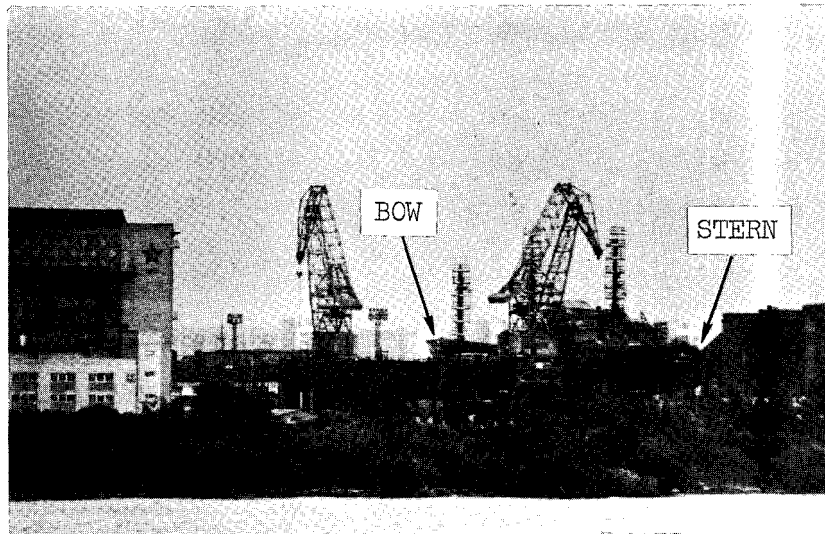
Outside building ways 9 Sep 66. CIA 1159760
